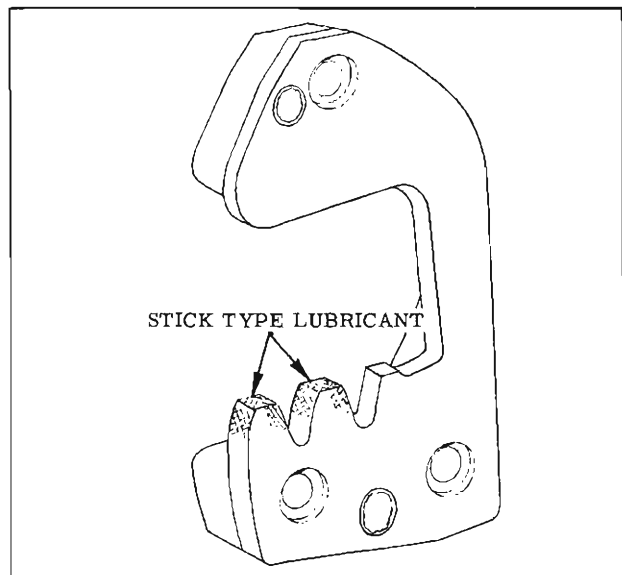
Door Lock Striker Lubrication (3300 through 3900 Series)
